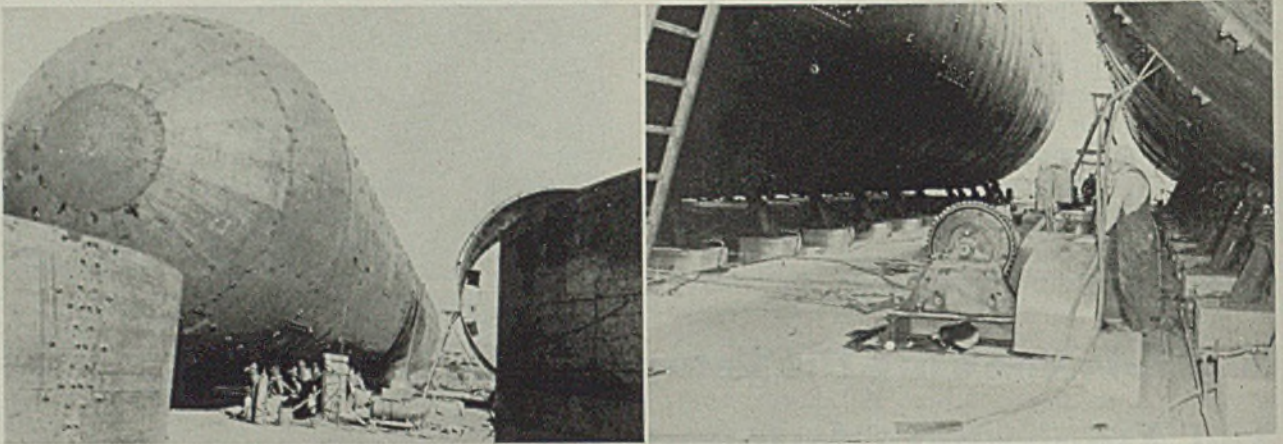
(Left)—Crawler crane lifting ring section into position. Prefabricated plates stacked at left. Fig. 2. (Right)—Placing section on hydraulic jacks on temporary foundations in assembling huge tanks
